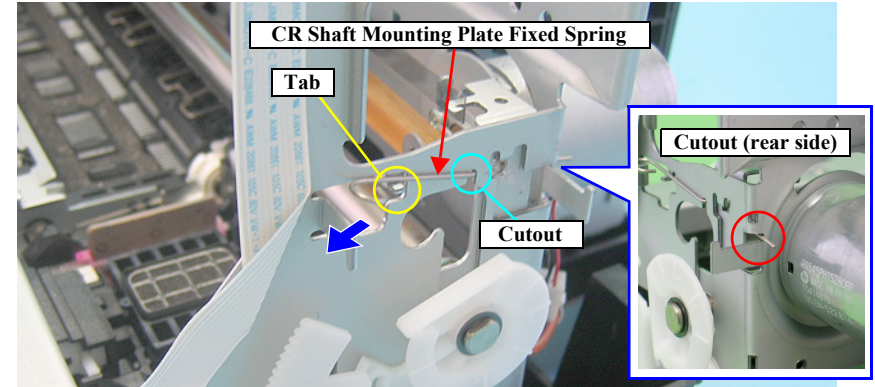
Removing the CR Shaft Mounting Plate Fixed Spring
